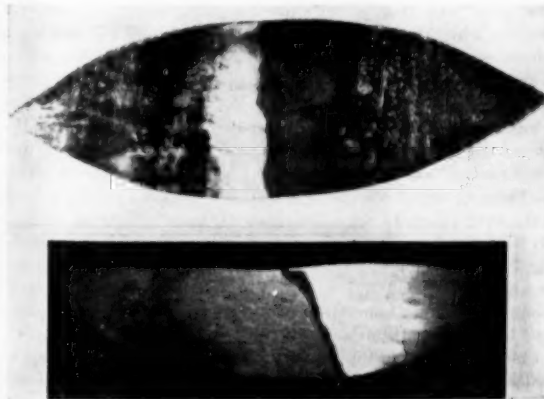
TOP VIEW AND SECTION THROUGH FIRST WELD-PROBE BOAT SAMPLE FROM PHILIP SPORN UNIT No. 1 TEST VESSEL REMOVED AFTER 84 CYCLES
